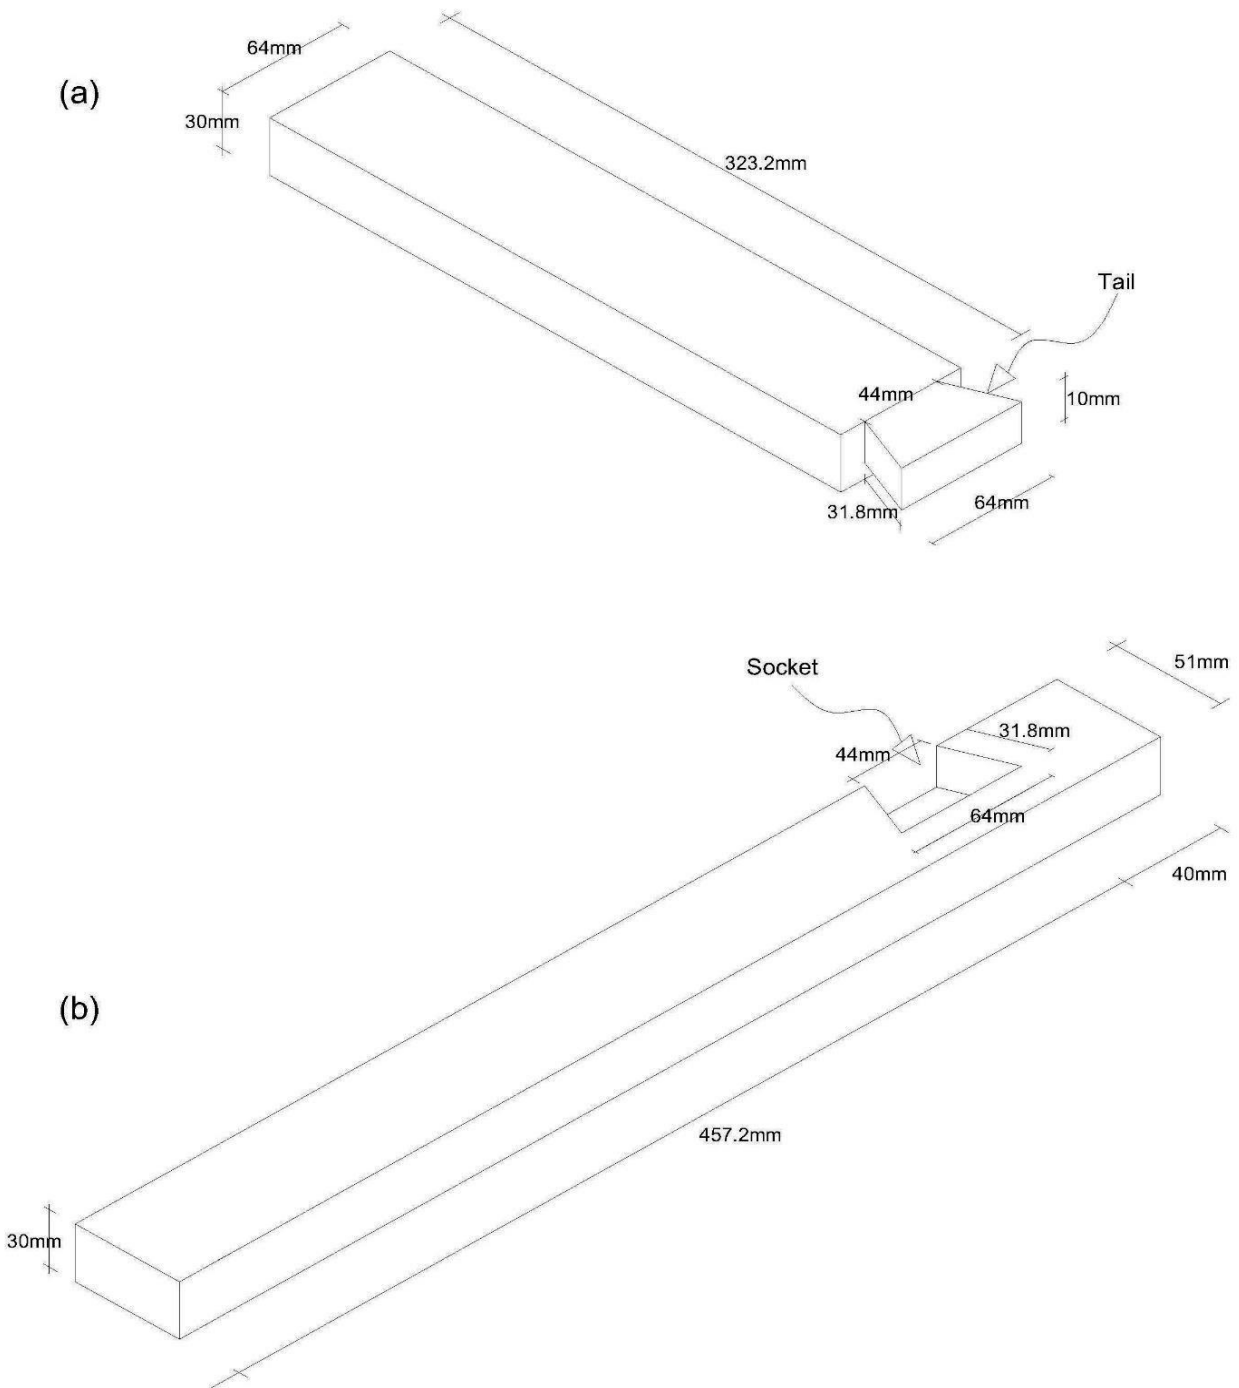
Schematic illustration of the rail (a) and leg (b) of Type LS dovetail joint showing the final dimensions of the tail and socket (Scale = 1:2.5).
